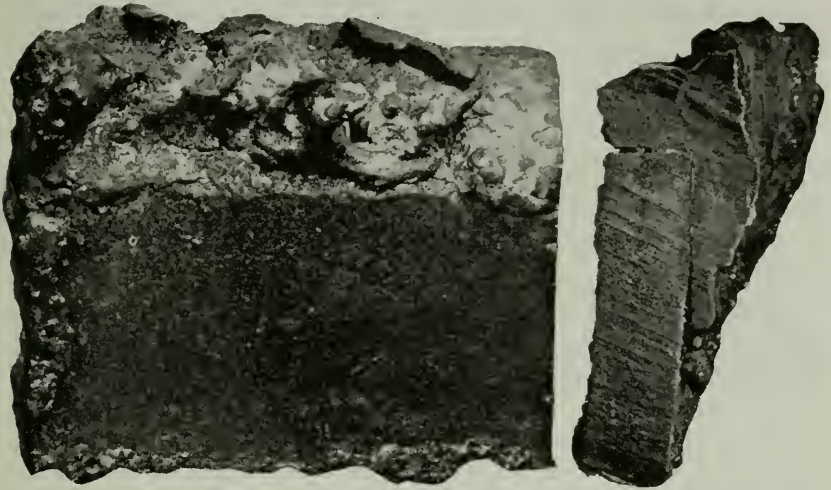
An example of uncontrolled welding. Parts of a 36" x 24" patch on a high pressure boiler are shown. The patch was welded flush with the shell plate and there was very little fusion. How little may easily be ascertained from the photograph at the right showing the cross section of the seam.
